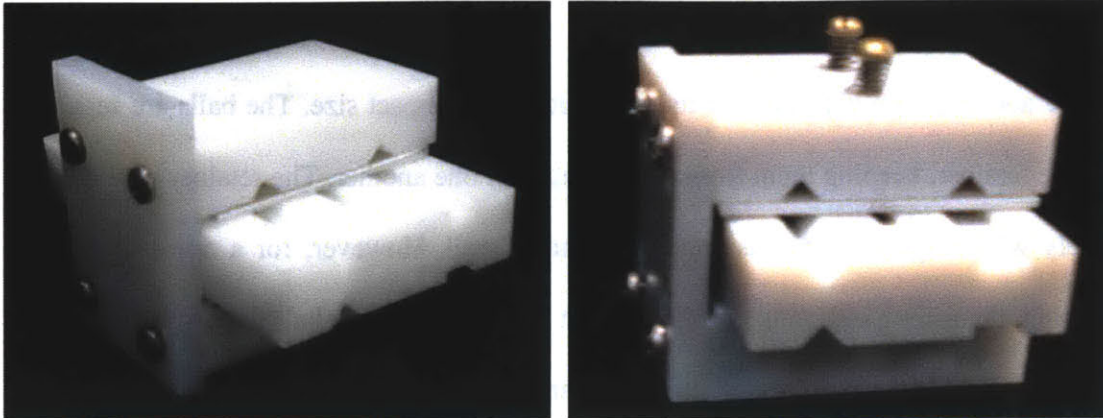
Prototype non-recirculating bearings, preloaded with bolts and springs. A piece of aluminum sheet metal serves as retainer for the glass balls. Left: Bearing machined out of Delrin. Right: 3D printed bearing of similar dimension.
